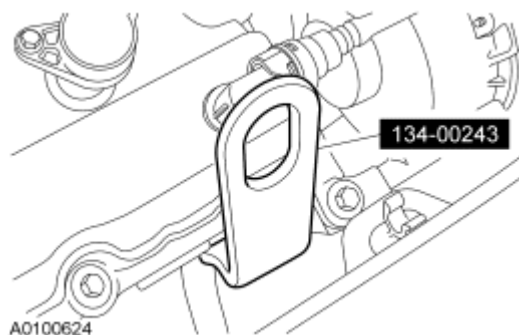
Special Tool Installed Onto LH Cylinder Head
